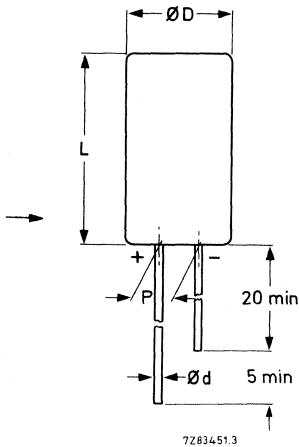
Style 1; see Table 1 for dimensions d, D, L and P.
